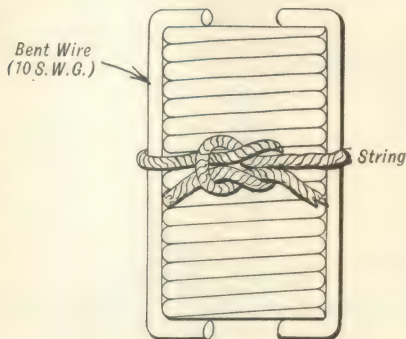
ALTERNATIVE METHOD OF HOLDING SPRING IN COMPRESSED CONDITION
